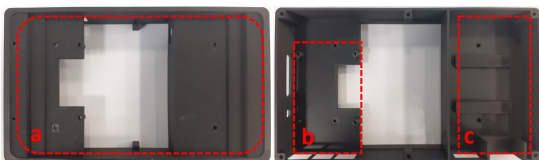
Top and rear view of the front part of the mechanical structure obtained by 3D printing.
